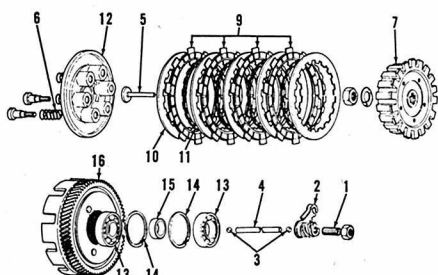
Exploded view of clutch used on YA-6 models.
